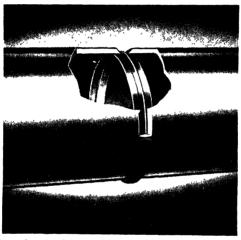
Use of a backing and aligning fitting for a pipe butt weld
